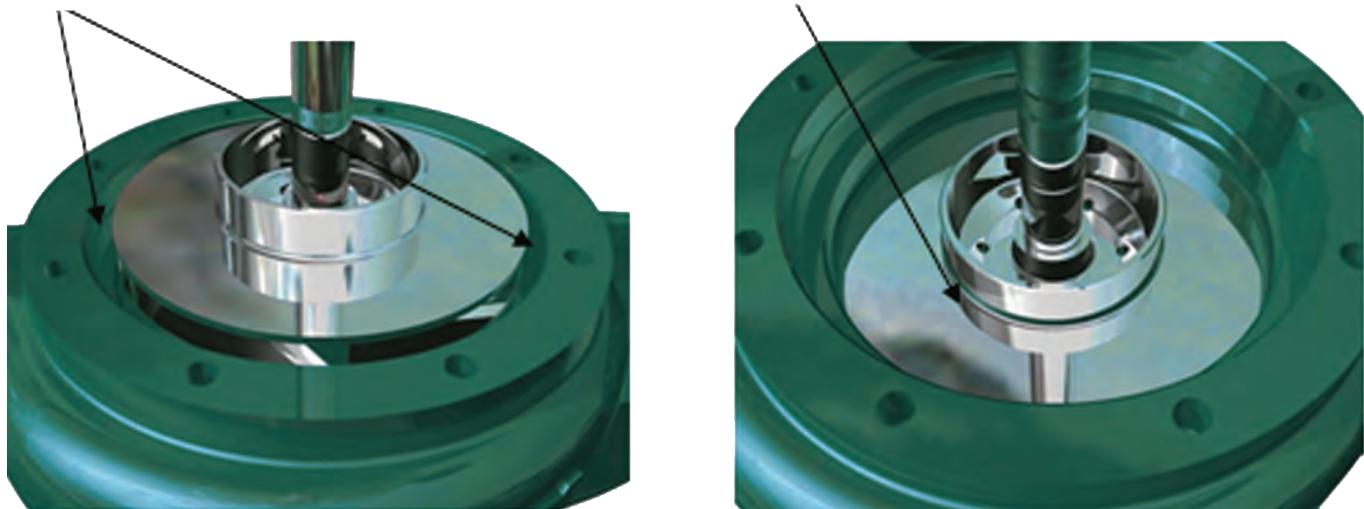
Inserting the bushing in the central bore of the adapter.
